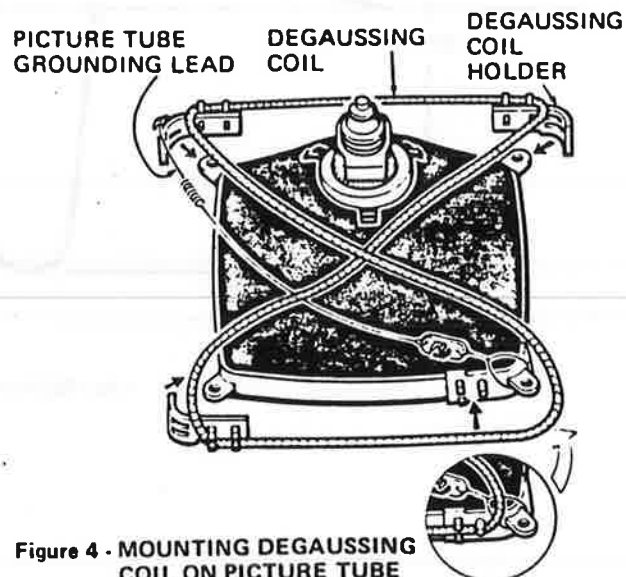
MOUNTING DEGAUSSING COIL ON PICTURE TUBE
